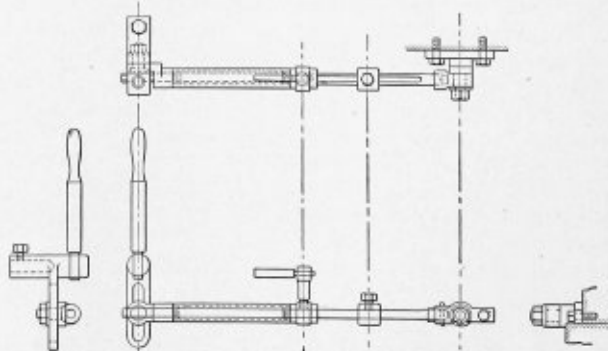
DETAILS OF TAPER ATTACHMENT.
